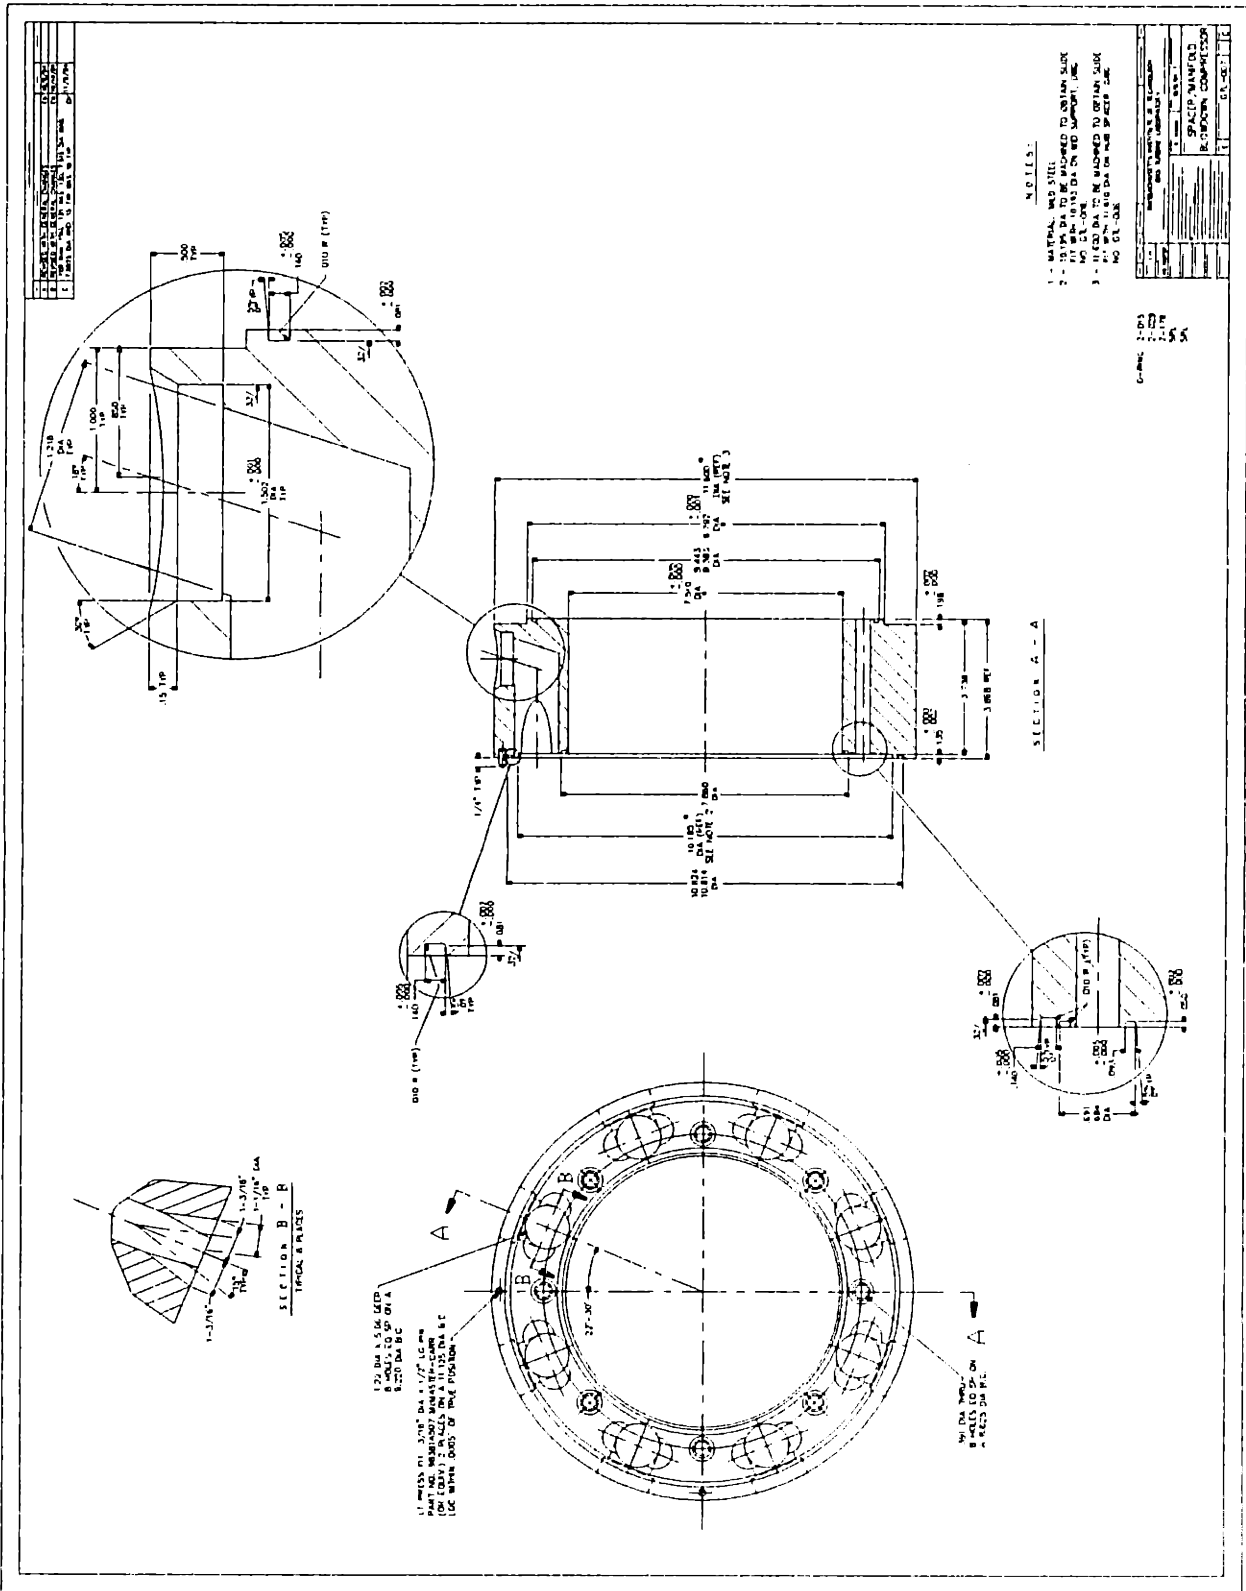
Fan stage drawing (GTL-007): wake management manifold
